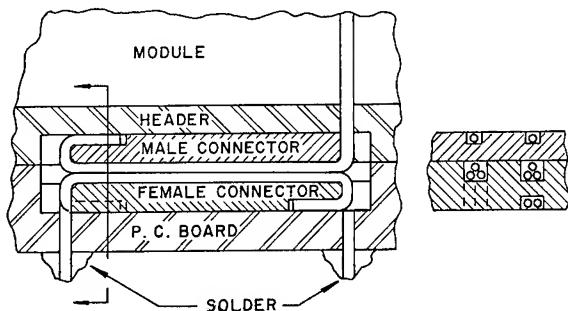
Detail of Design No. 2 when mated. Note single to double wire contact in right section.
